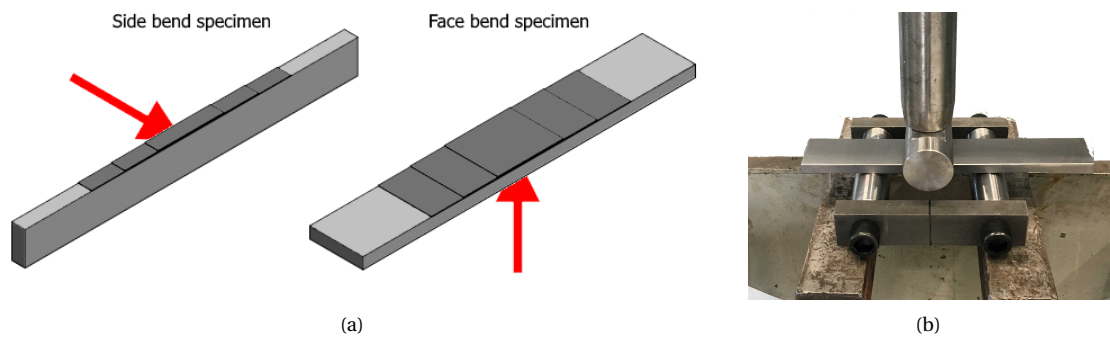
(a) sketch of the side and face bending samples showing the direction of loading in the bending test. (b) picture of the bending setup including a sample before bend testing.
